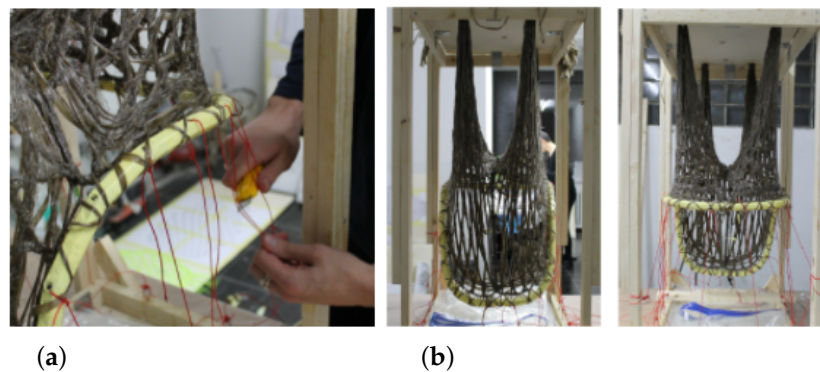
Forming (a) Tension strings being attached to the seat frame. (b) The prototype in the reusable frame curing at room temperature.
